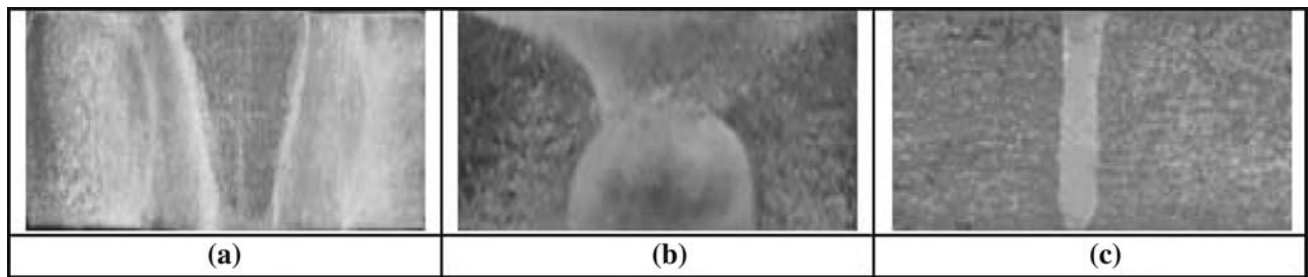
Macrograph of welded joints (10×). (a) GTAW, (b) FSW, (c) LBW
